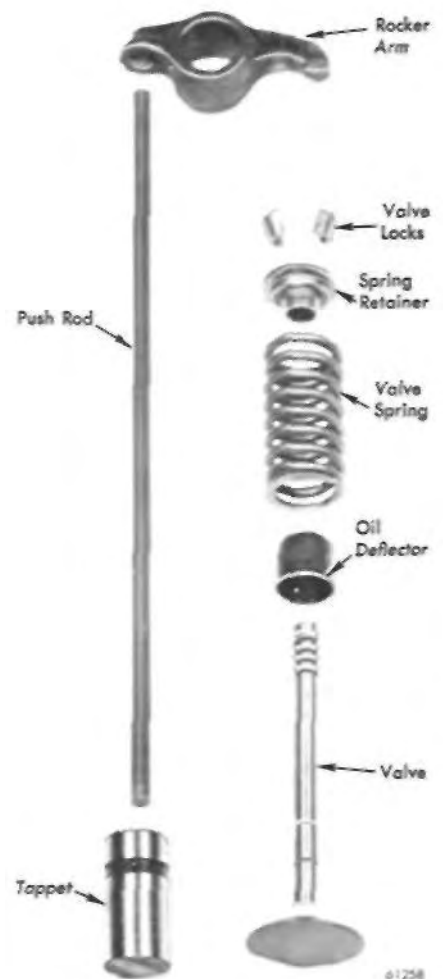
Valve, Push Rod, and Tappet Assembly Sequence
